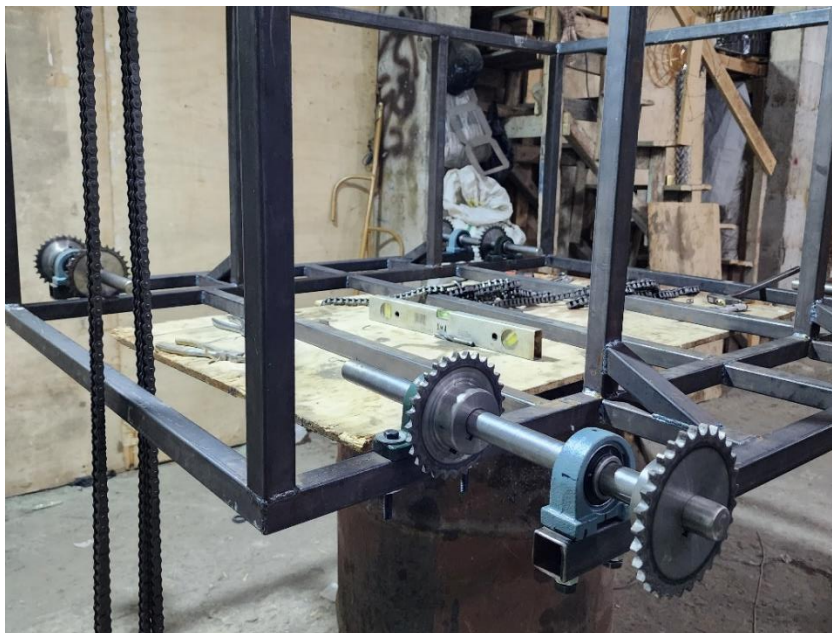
Final shape after mounting bearings, shafts and sprockets to the chassis
